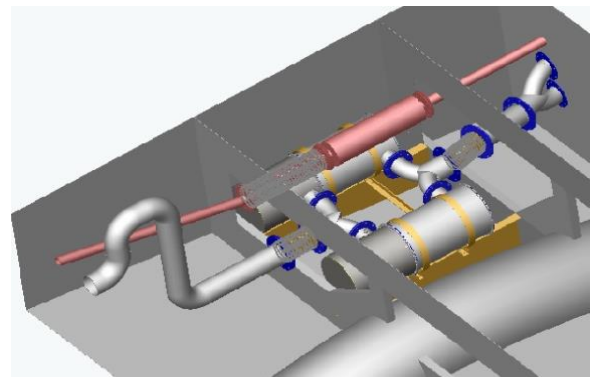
MPDE modified ERADPF exhaust layout (isometric)
